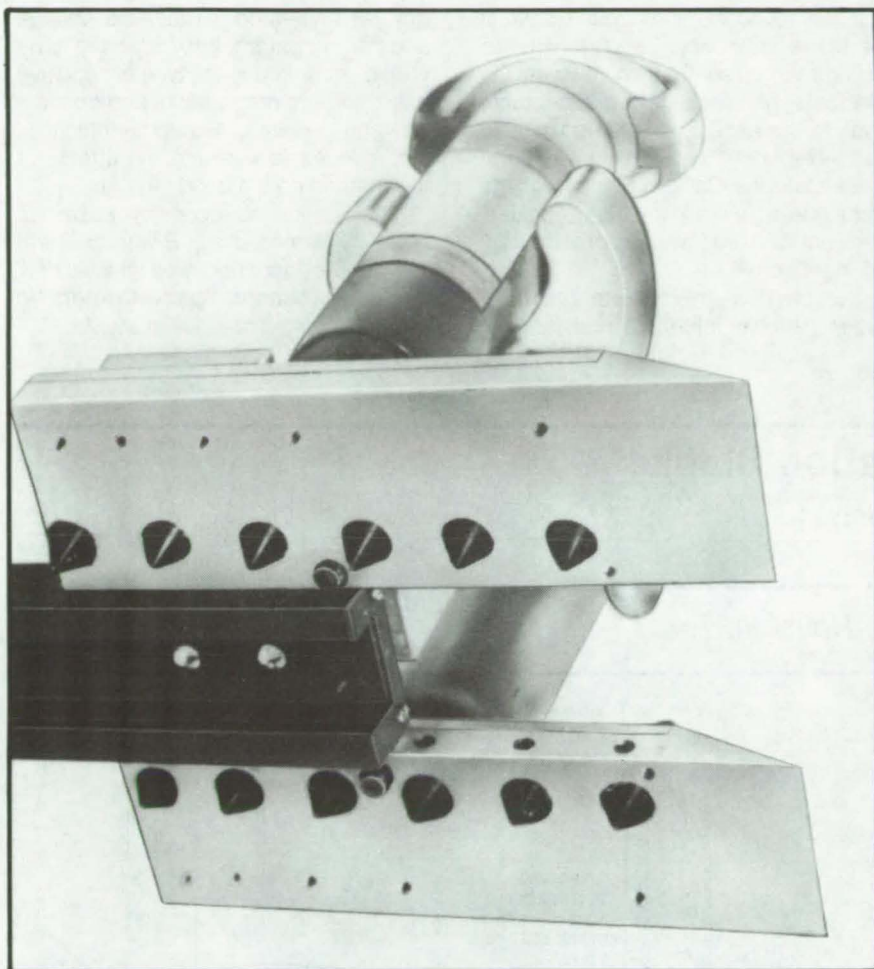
This Underside View of paste-dispensing manifolds shows 12 nozzles that apply solder to a solar cell. Contact ribbons are guided into place by the wedge-shaped ends of the manifolds.
